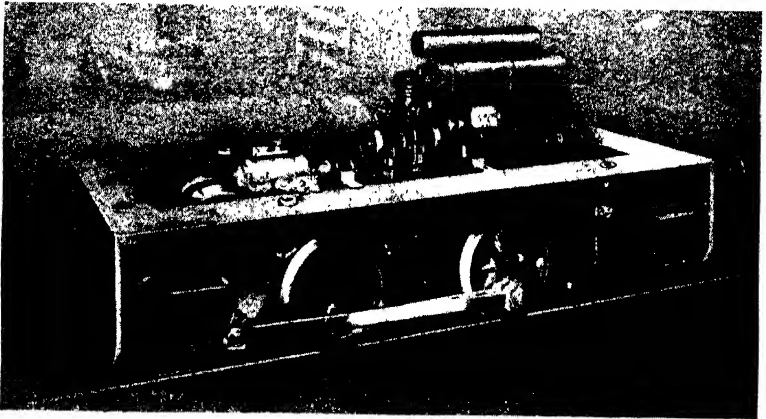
MEDIUM-WEIGHT LOCOMOTIVE FRAME
